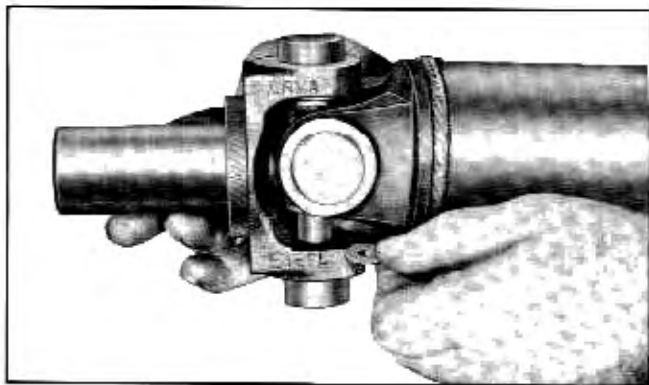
Placing Washers Inside Bearing of Splined Yoke Member
